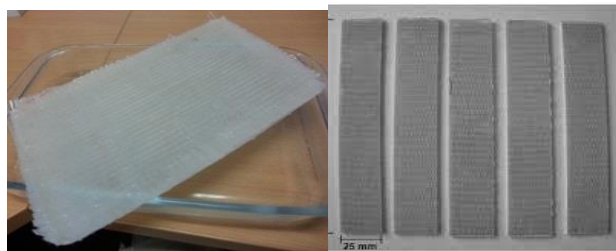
Glass fibre SMPC sheet fabricated using the hand layup technique
